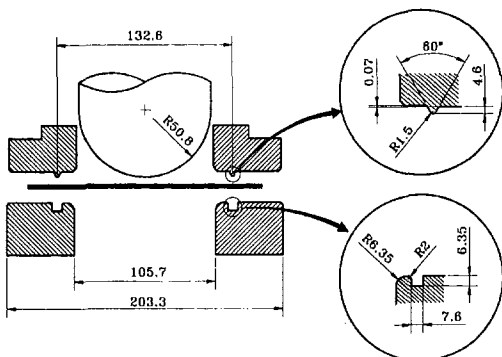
Geometry and dimensions of the die set used for LDH and FLD tests
